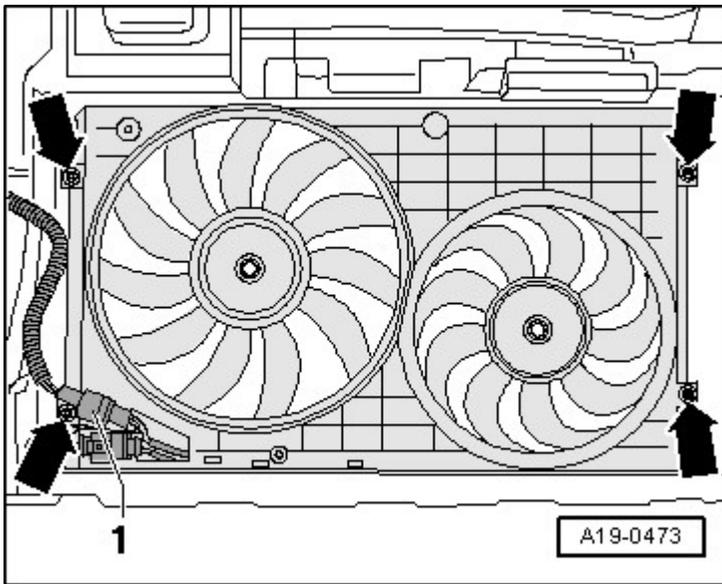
Identifying Coolant Fan Control Module J293 And Screws
